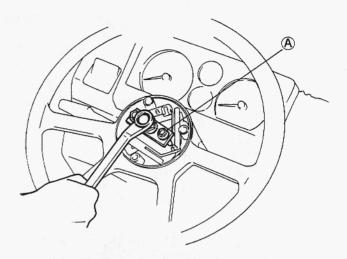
(A) Special tool (Steering wheel remover 09944-36010)
